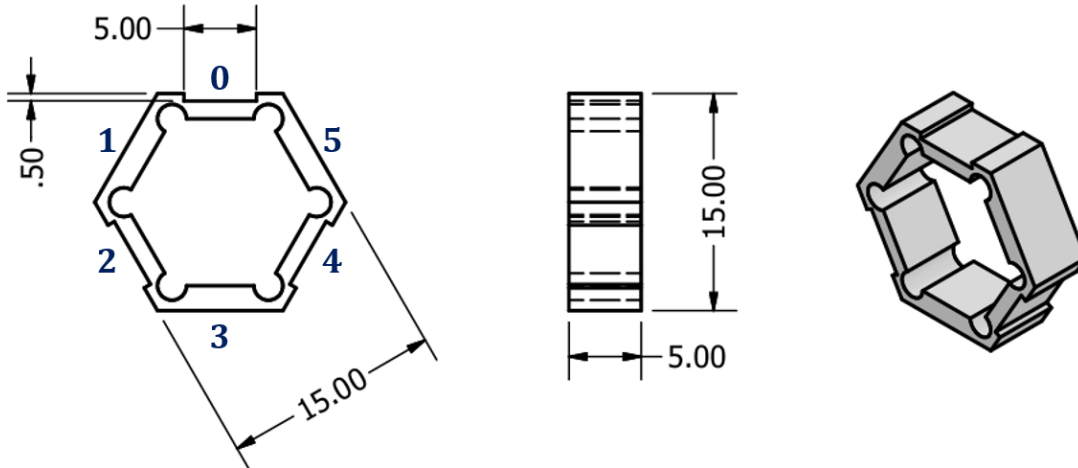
Technical drawing of the robot geometry. Cavities on faces 0, 2, and 4 house rigid magnets. Semicircular relief grooves at the vertices between faces act as compliant flexures to enable controlled pinching deformation.
